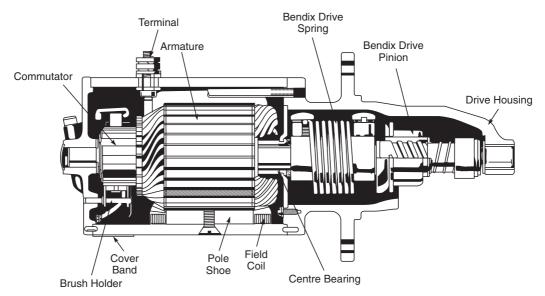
Sectional View of Starter Motor with Drive Mechanism
